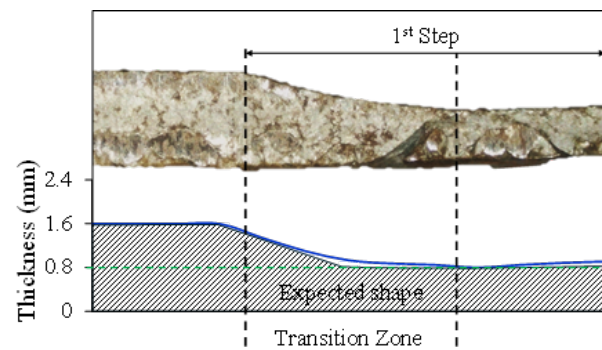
Side view of the first step of successive forging on JSC1180YN UHSS sheet
